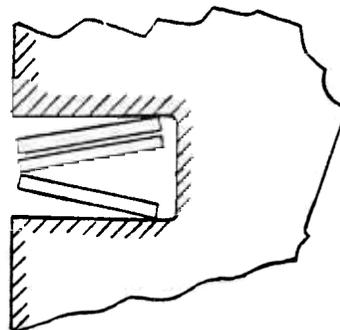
Showing how the laminated compression ring should be fitted into its groove.
